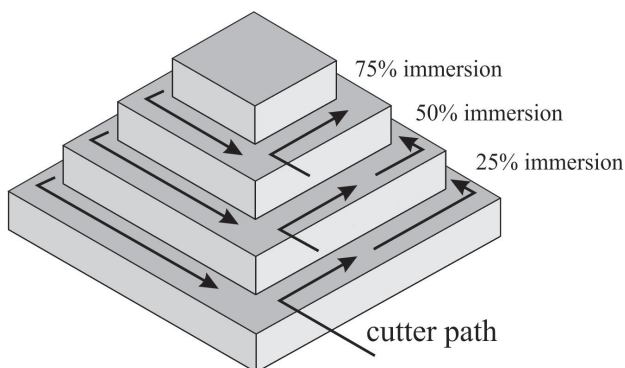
Second test part – pyramidal shaped boss. Cutter path and immersions are indicated
